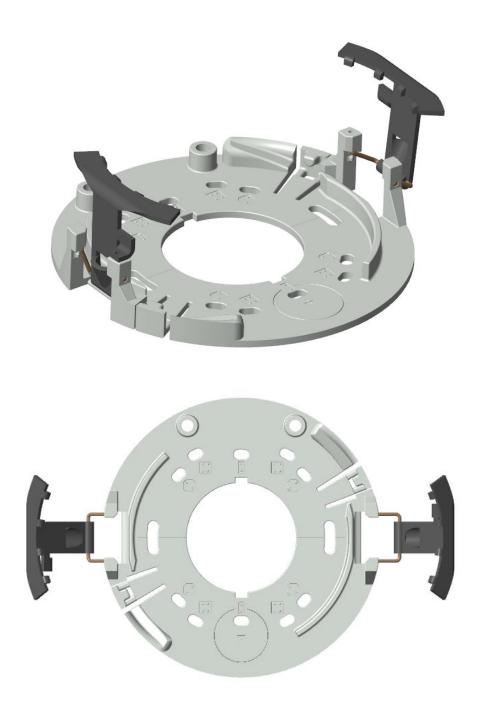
Mounting bracket with locks attached. Top: Perspective with one lock neutral and one lock closed. Bottom: From above
